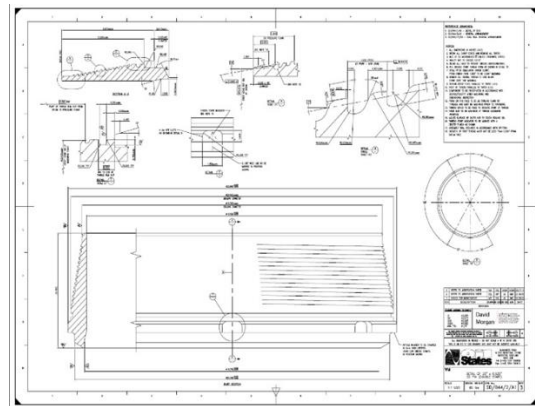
Schematic Drawing for 30'' × 1'' PIN Threaded Premium Connector. [1]
